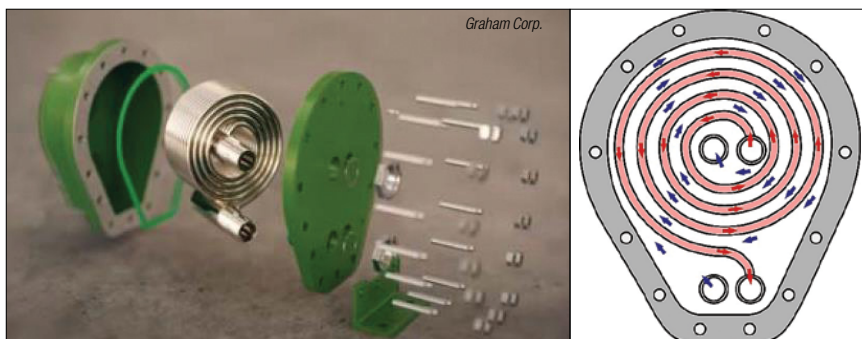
On the left is an exploded view of a spiral-tube heat exchanger. The flow path of the heat-transfer fluid is shown on the right
